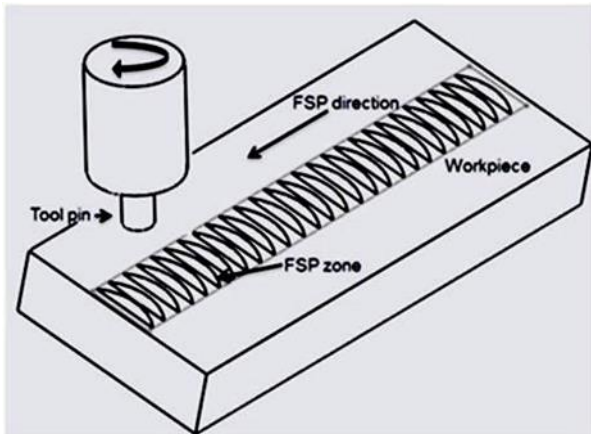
FSP layout showing the FSP tool shape, and the resulting processed zone.
